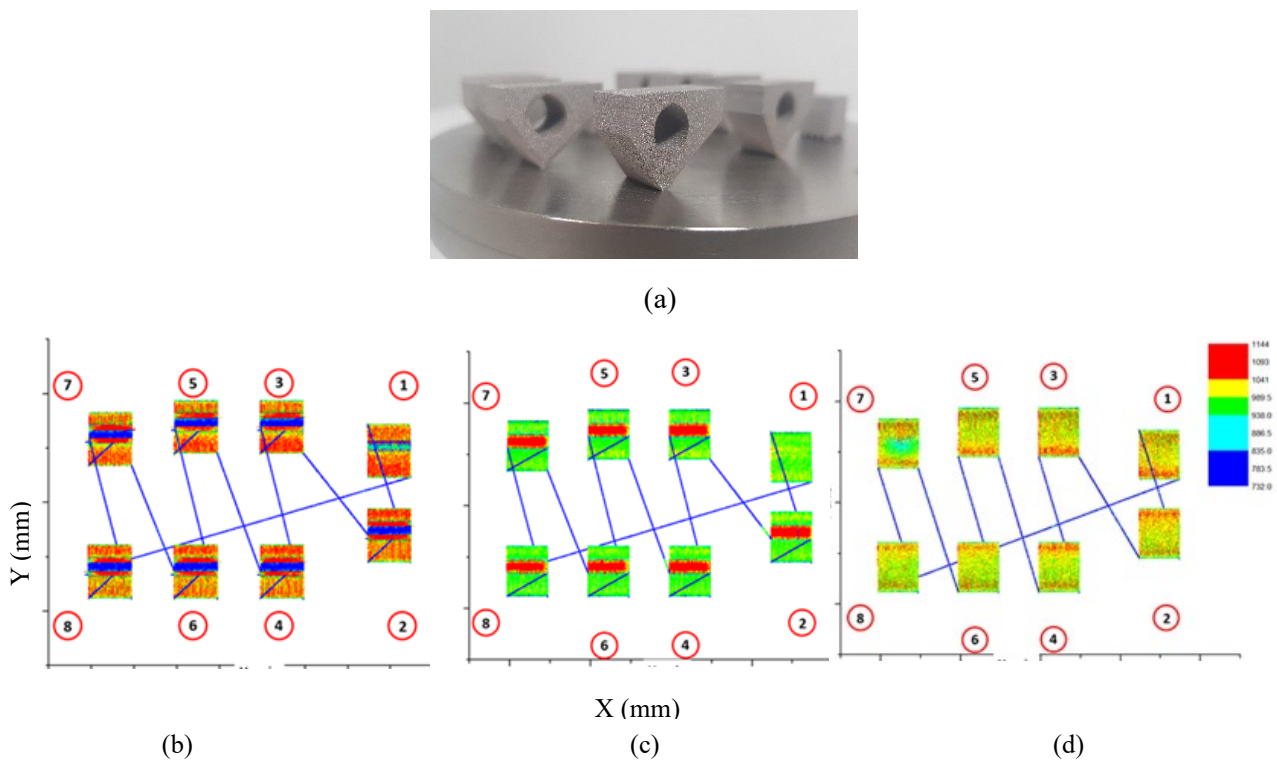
(a) Picture of stainless steel part printed through hole and of thermal layer profiles build layer (b) through the hole, (c) in the first layer above the hole after channel closure, and (d) several layers after the closure.
